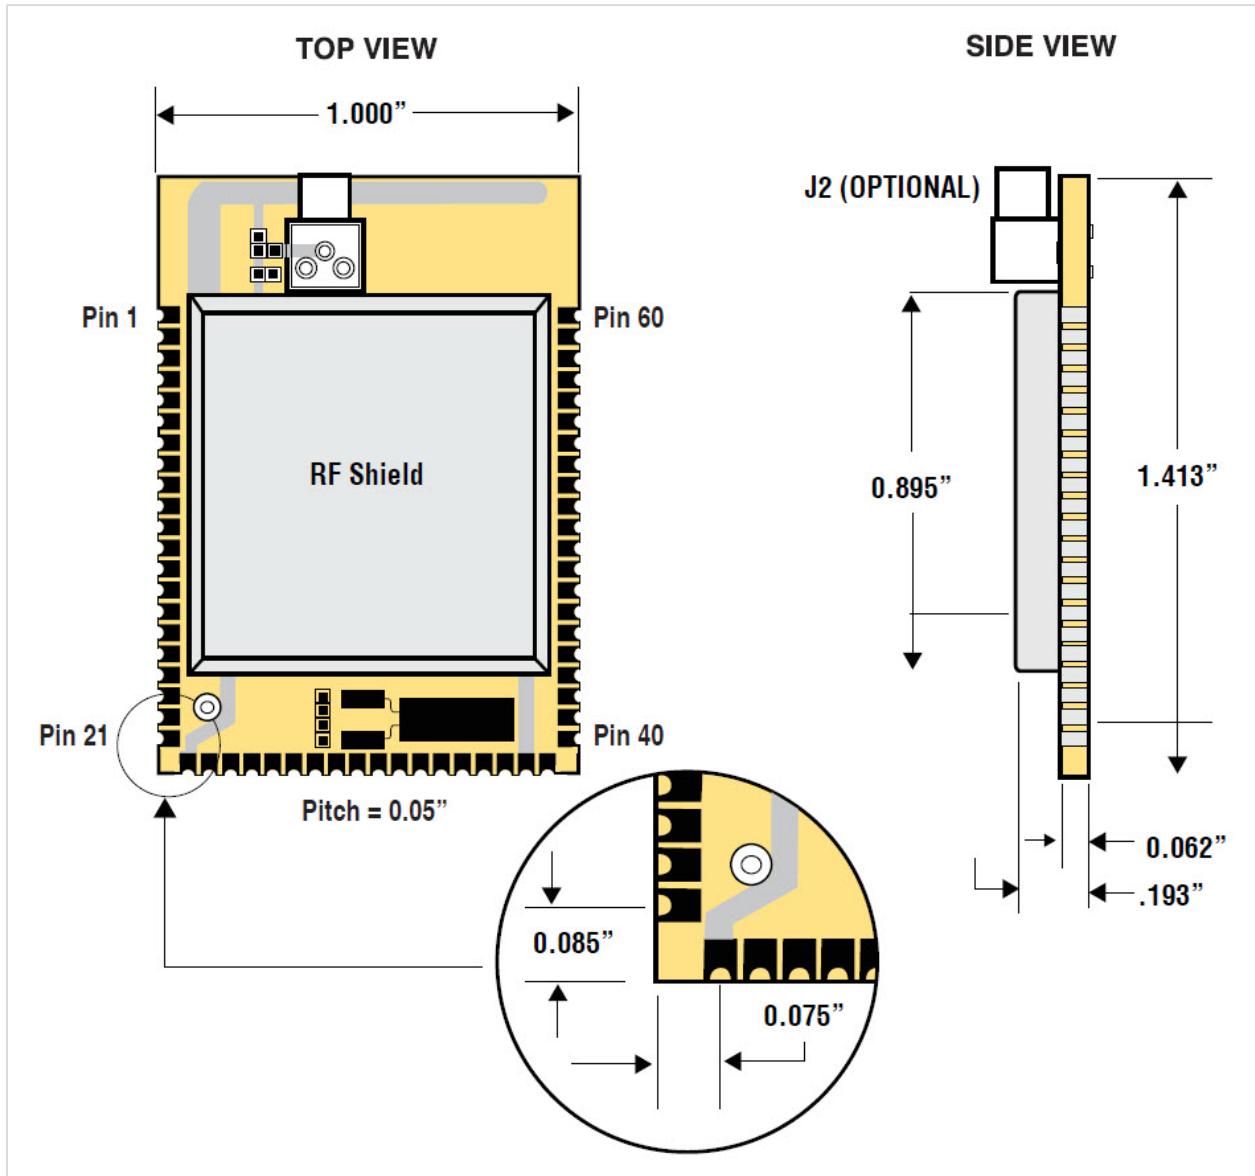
Mechanical drawings of the SM700PC1 Module
